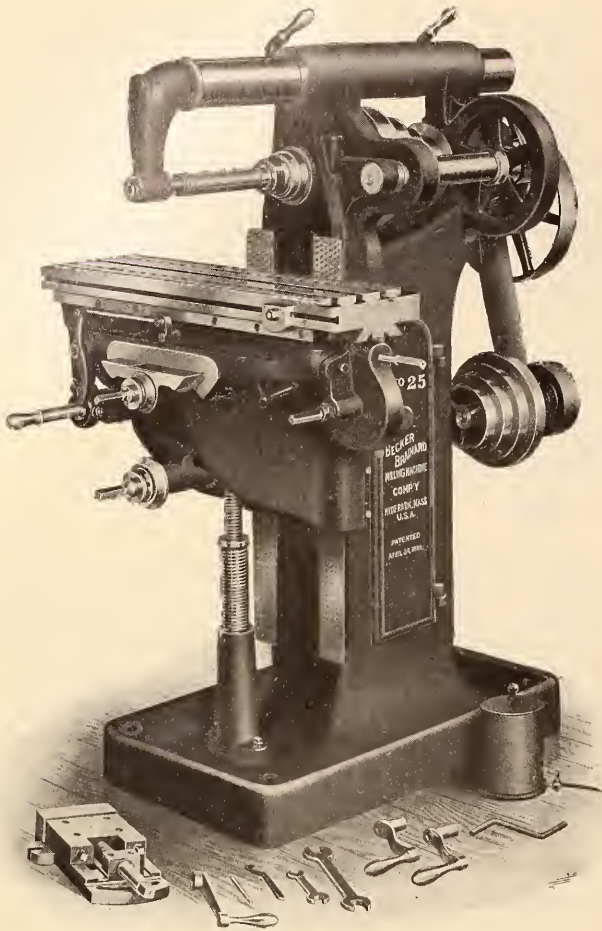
PLAIN MILLING MACHINE WITH NON-ADJUSTABLE SPINDLE.
